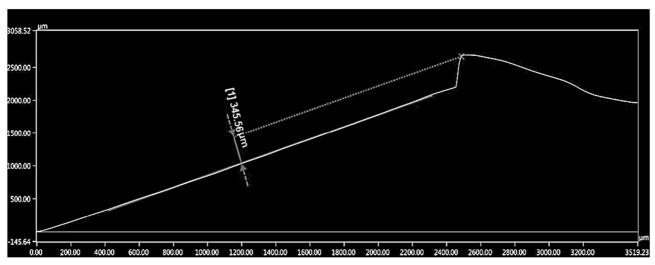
Example of a burn height measurement (for milling conducted using a 3-tooth end mill with PCD inserts,  $v_c = 120 \text{ m.min}^{-1}; f_z = 0.08 \text{ mm.tooth}^{-1}$ )
